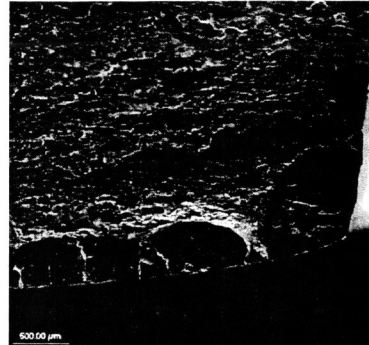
SEM picture of fatigue fracture surface. Note the multiple cracking.
